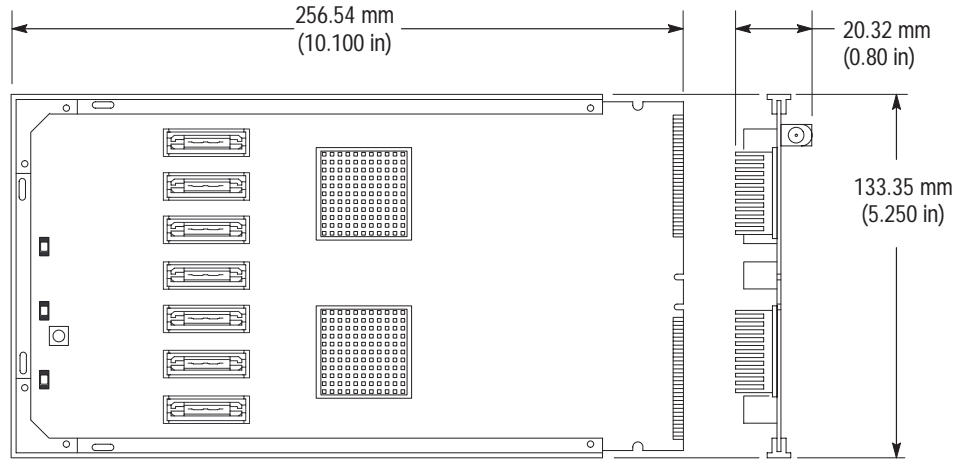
Dimensions of the Rambus Direct probe adapter
